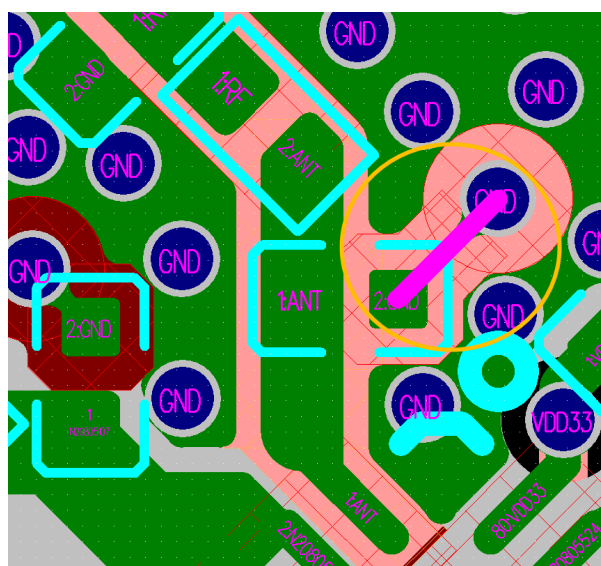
ESP32-S31 Stub in a Four-layer PCB Design
